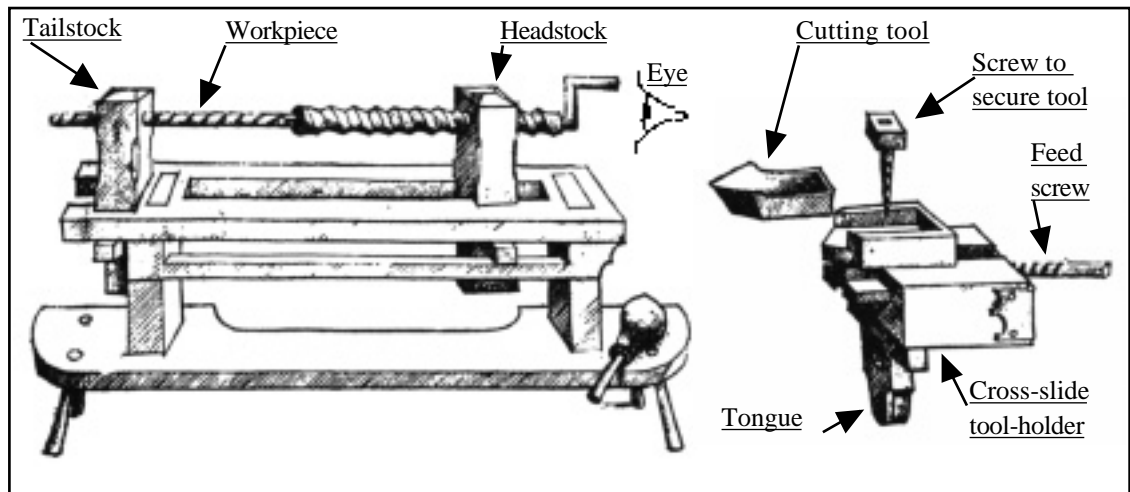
Clockmaker's lathe with cross-slide toolholder
